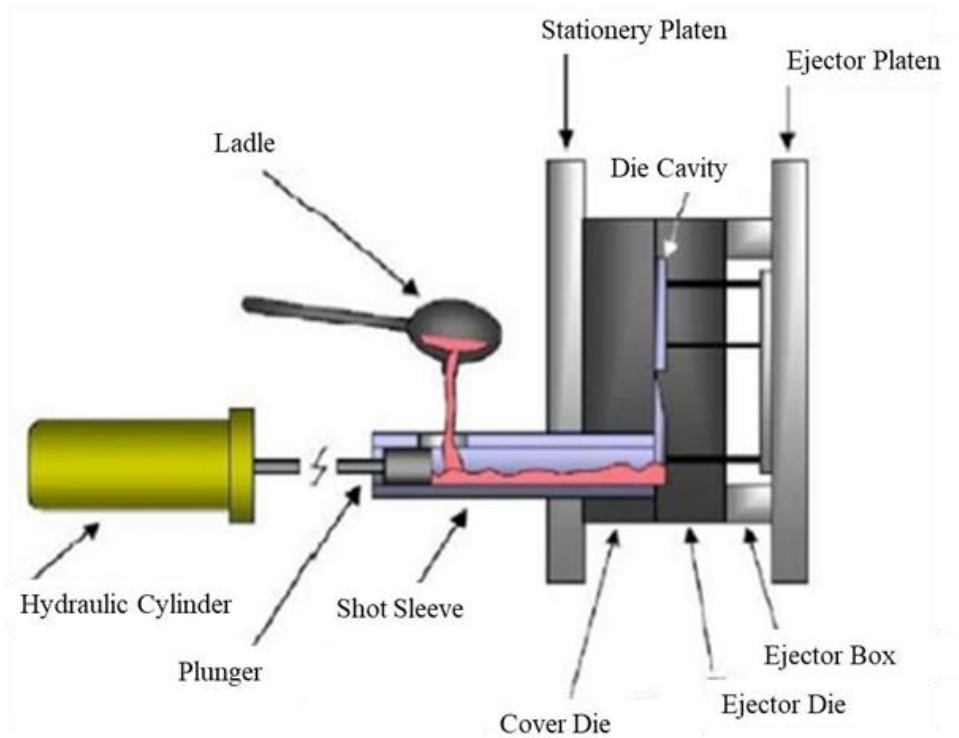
Schematic of Cold Chamber Die Casting Machine (Singh, 2016)
